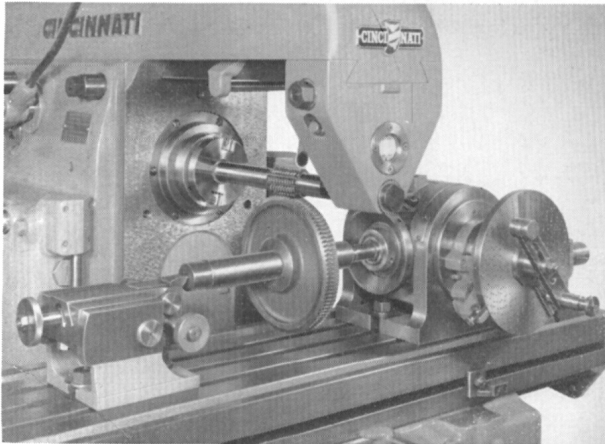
Set-up for hobbing the teeth of a worm wheel on a milling machine.
